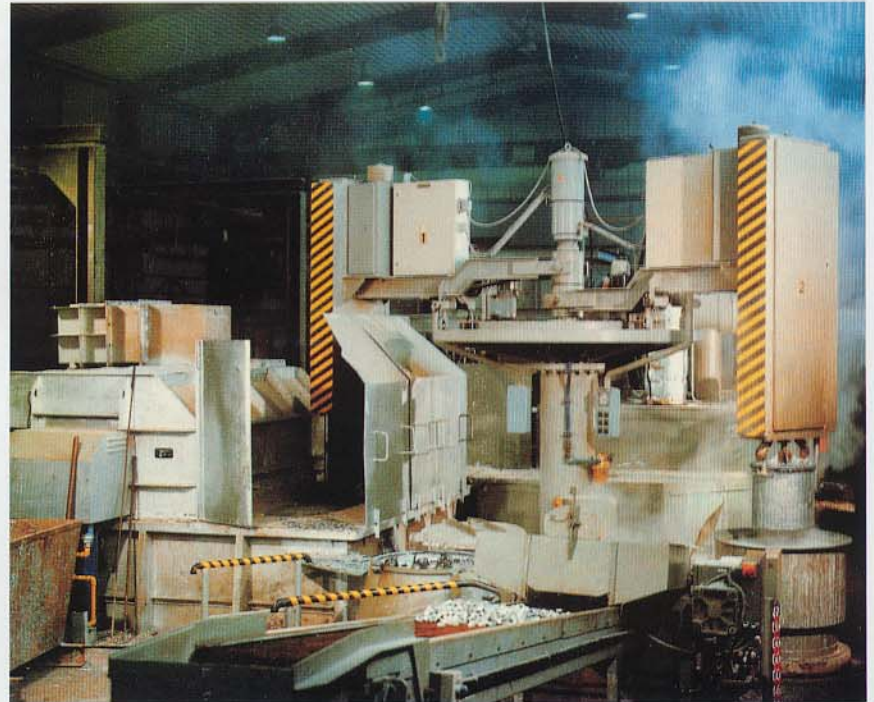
Automated hot dip galvanizing plant for small parts (centrifuge or spin galvanizing).
